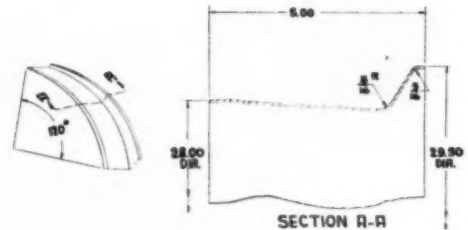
Circular flanged section of titanium alloy formed hot in one operation. Three of these parts are welded together to form a complete circle.
